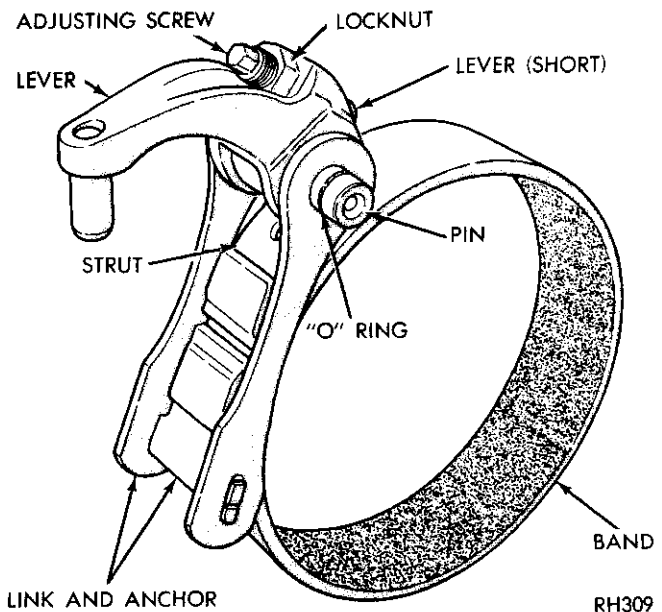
Low-Reverse (Rear) Band And Linkage—727
